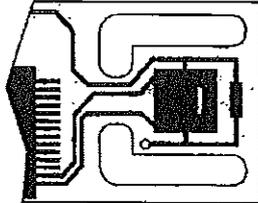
Top view of example of mounted SHT2x with slits milled into PCB to minimize heat transfer.
